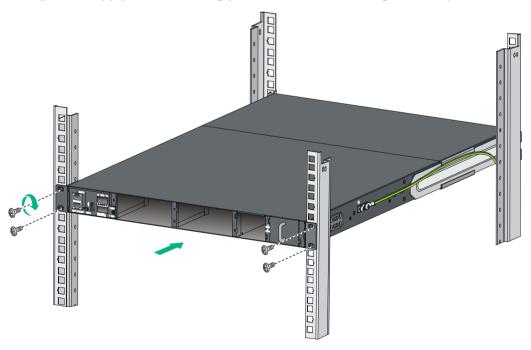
Mounting the HPE 5930-2Slot+2QSFP+/HPE 5930-2Slot+2QSFP+ TAA switch in the rack (network port-side mounting position for the mounting brackets)
